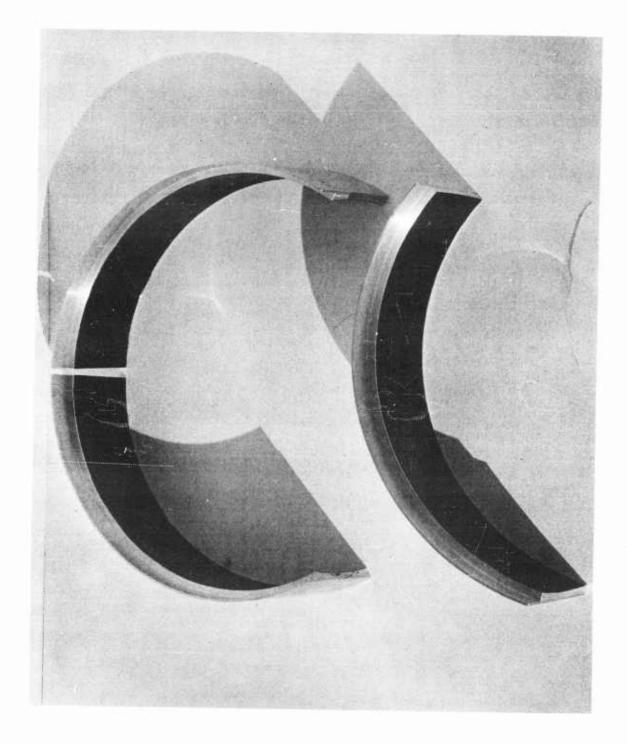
Metal Retainer Bonded with "Fabroid"
